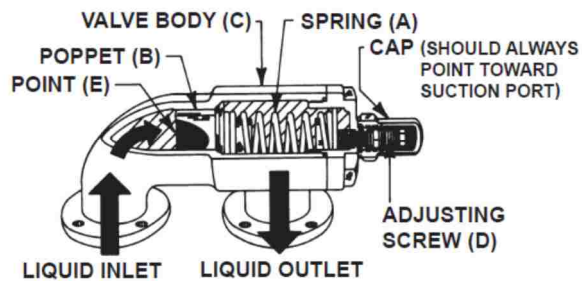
Cutaway of Viking internal pressure relief valve [9]
